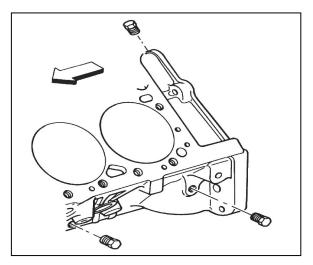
Left Side Cylinder Block Coolant Drain and Oil Gallery Plugs
